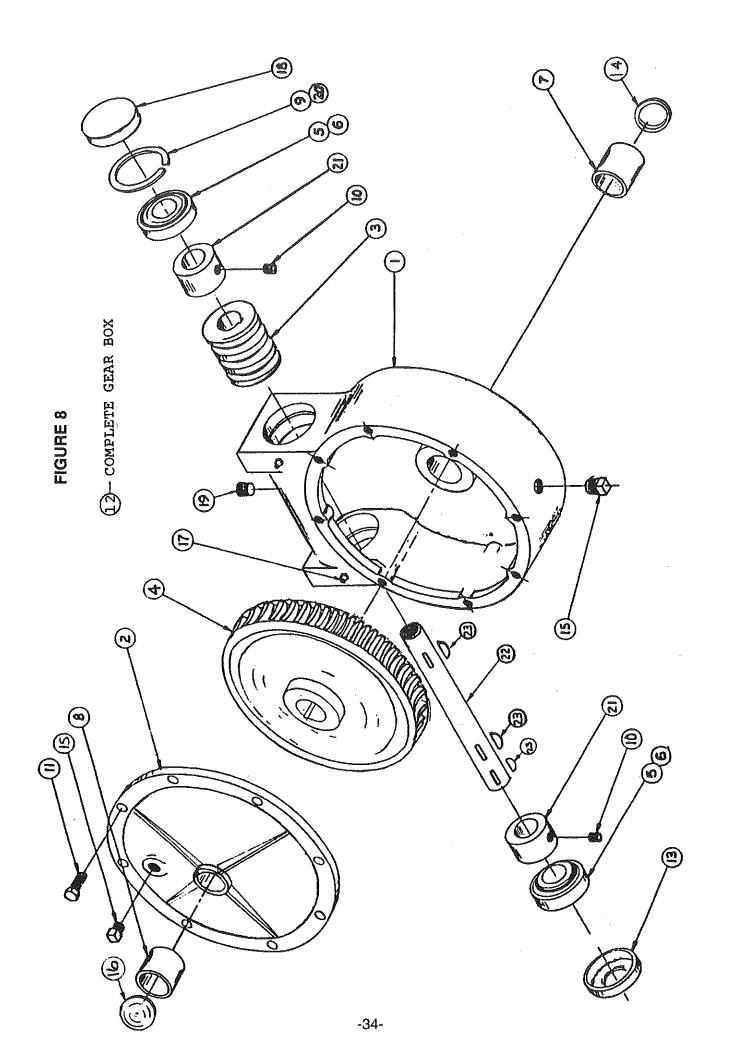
H&S MODELS 310, 370 & 430 WORM GEARBOX ASSEMBLY SPREADER MODEL & PART NO.
